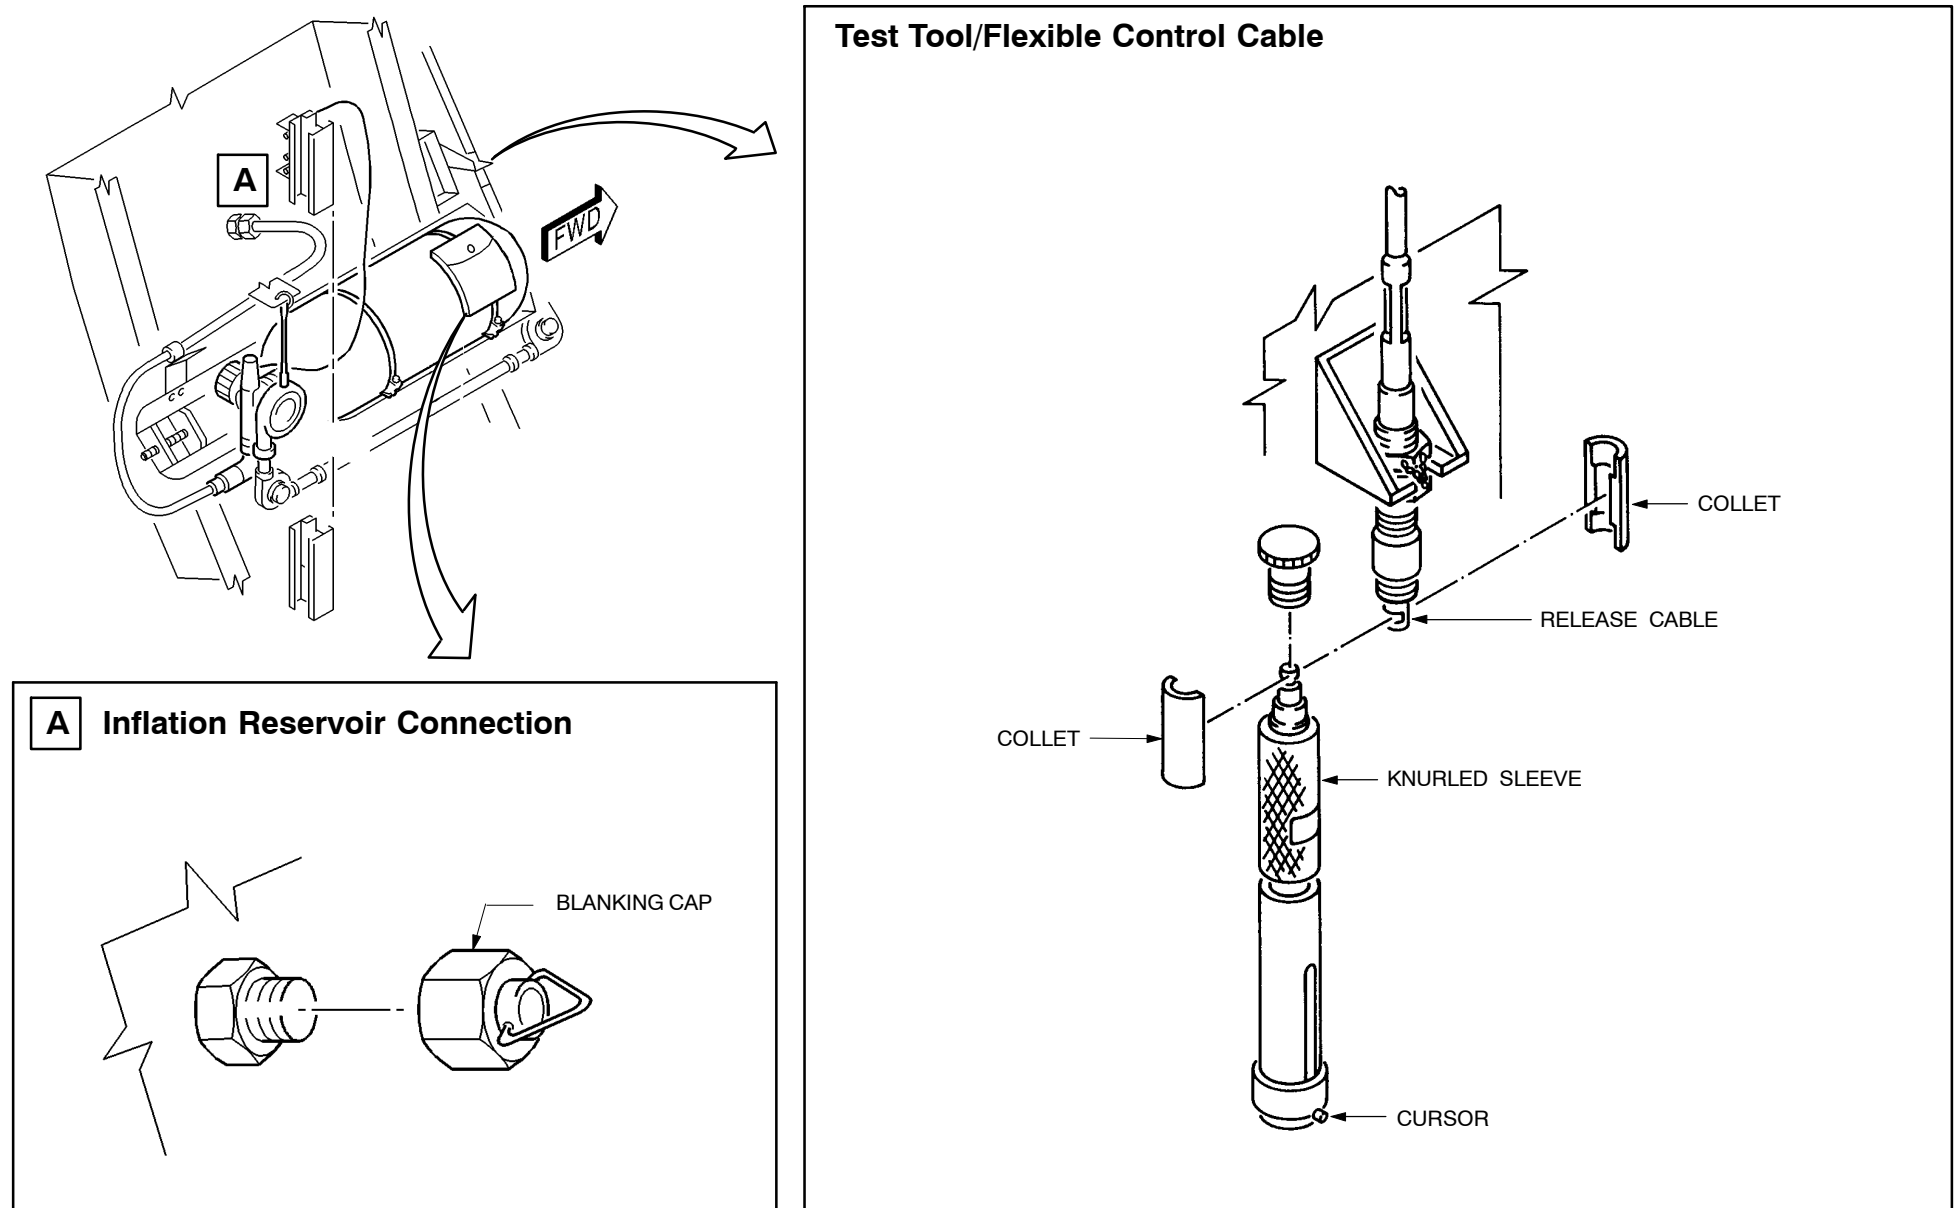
A318/A319/A320 Flexible Control Cable Test Tool
